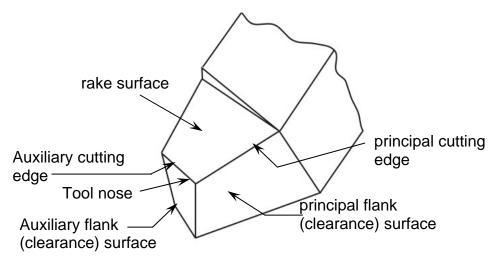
Basic features of single point tool (turning) in Tool-in-hand system
